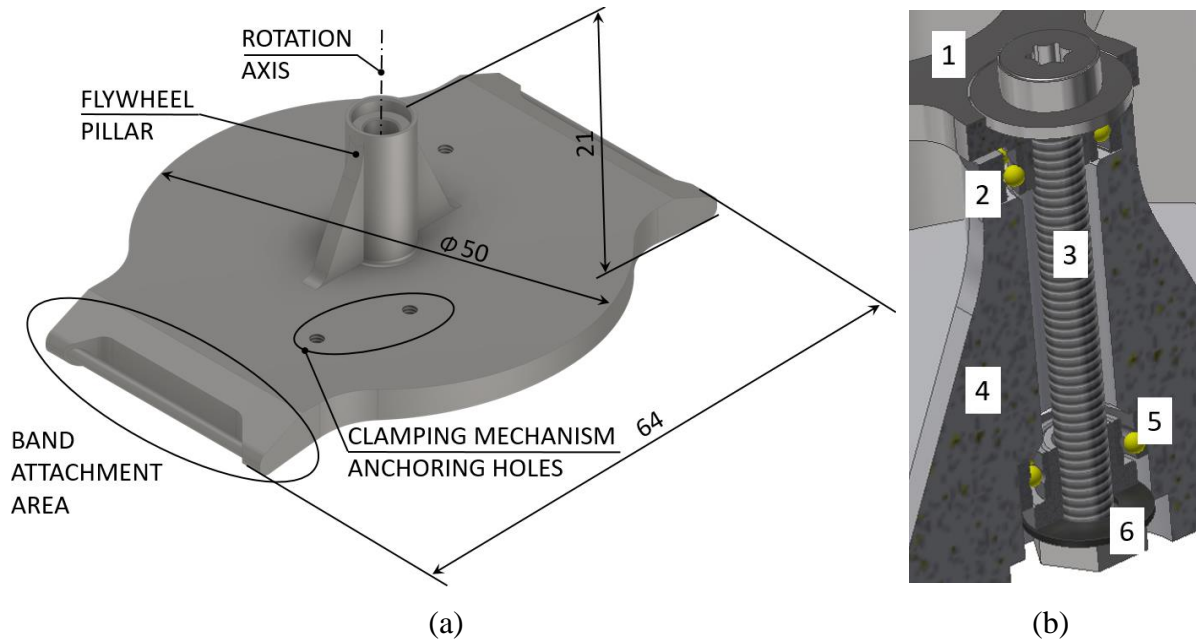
Wearable device platform (a), and flywheel bearing arrangement inside the pillar denoted as flywheel (1), top bearing (2), connecting bolt (3), pillar (4), bottom bearing (5) and bottom-end tightening nut (6) (b).
